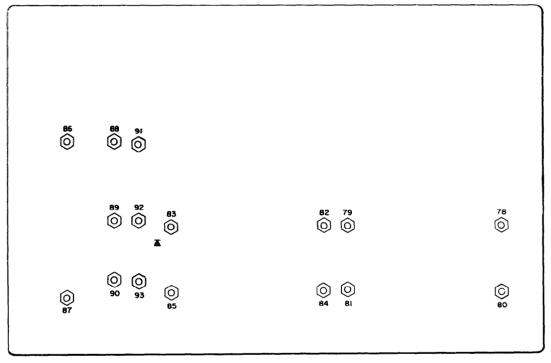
Cover assembly 1A3A9A4, terminal location diagram.
